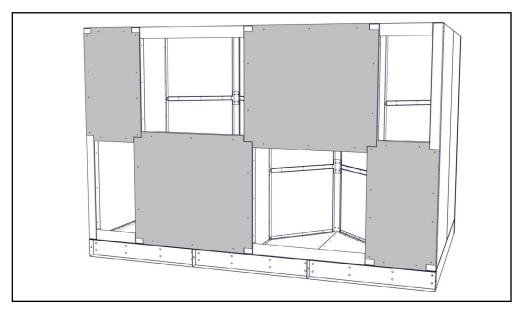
INSTALL FACE PLATE PANELS
